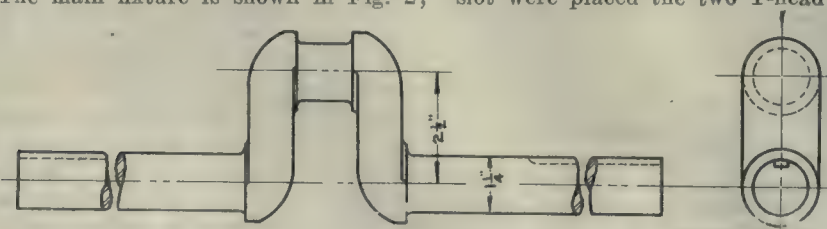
TYPE OF CRANKSHAFT TO BE KEYSEATED.
